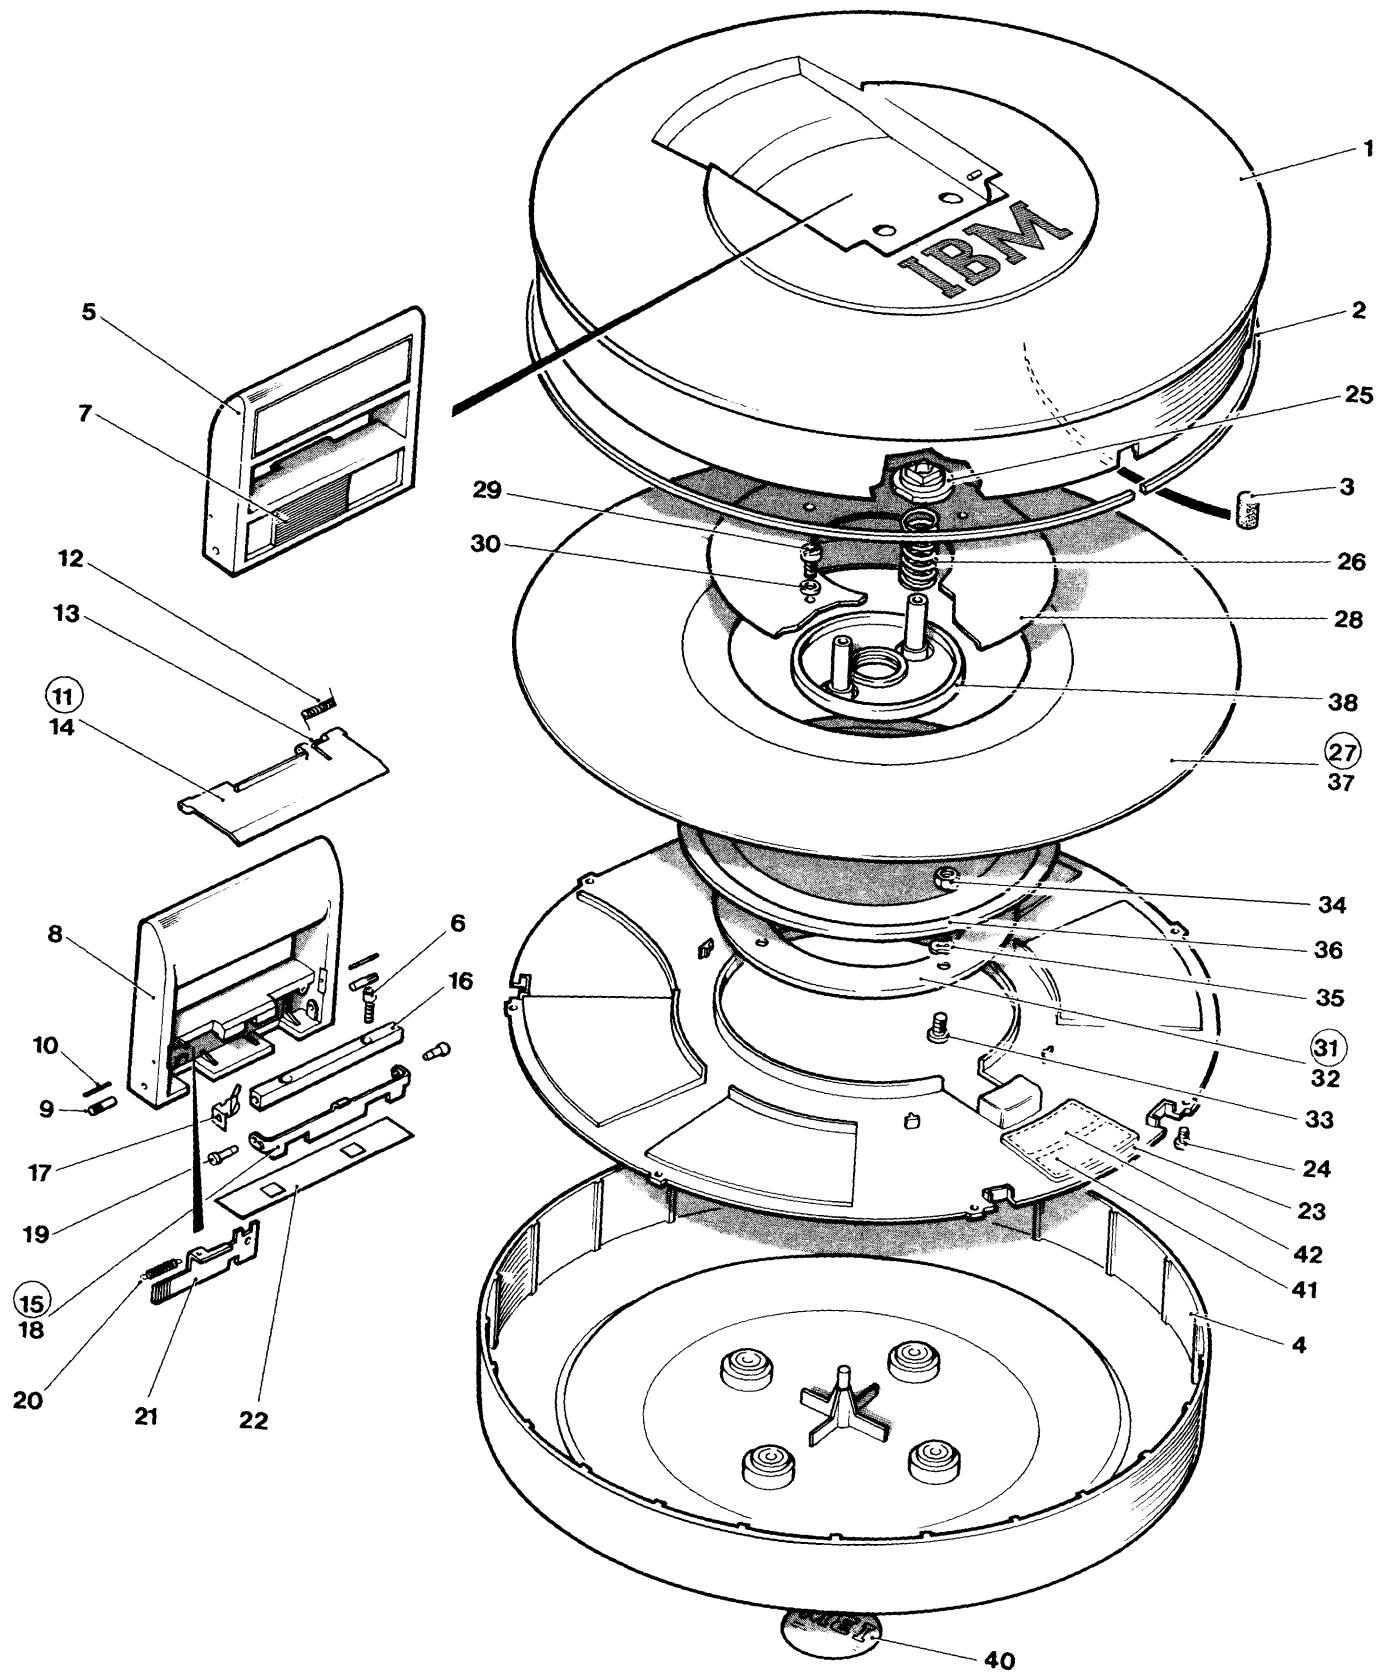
5440 CARTRIDGE ASSEMBLY
